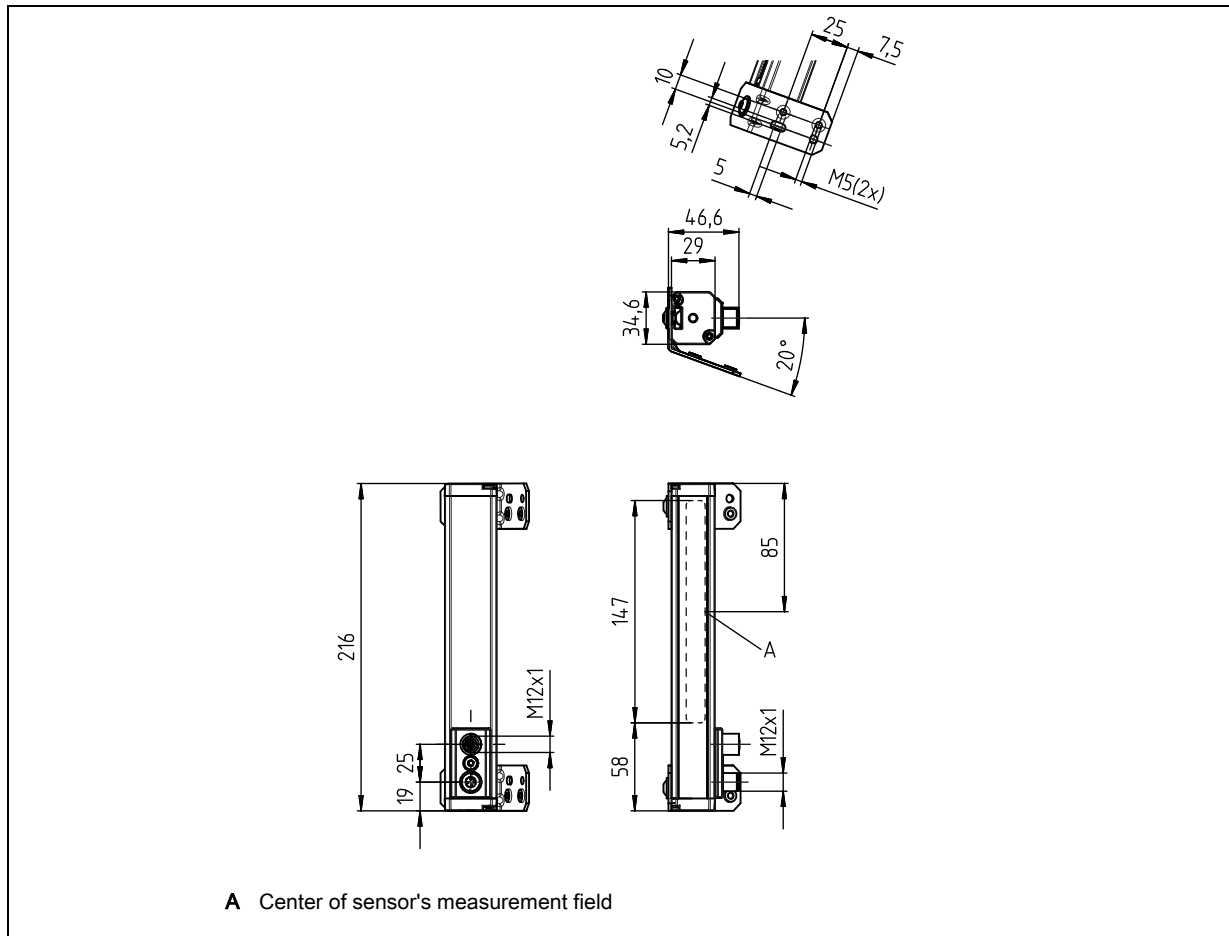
Dimensioned drawing OGS 600-140/CN-M12 – short version
